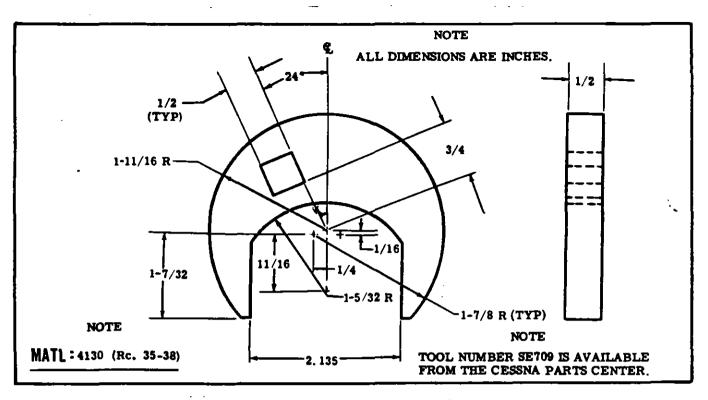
Oil Filter Adapter Wrench Fabrication
